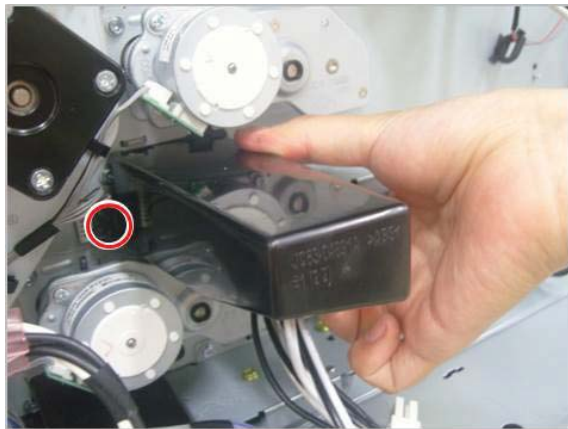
Remove the fuser drive and LVPS boards and cage
